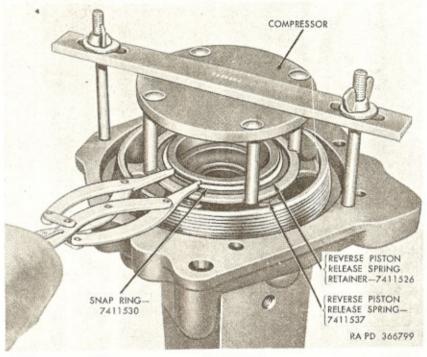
Using compressor—C7950251 to compress reverse piston release springs.
